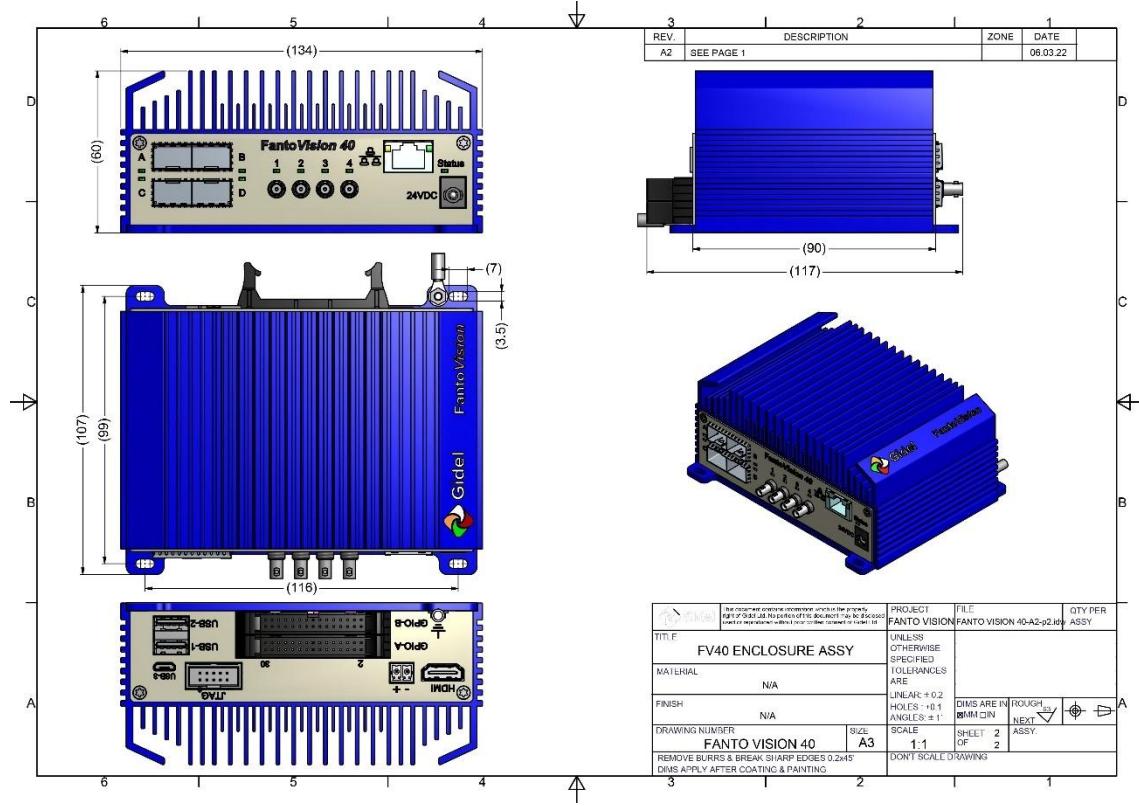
FantoVision40 without a Fan Mechanical Dimensions (mm)
